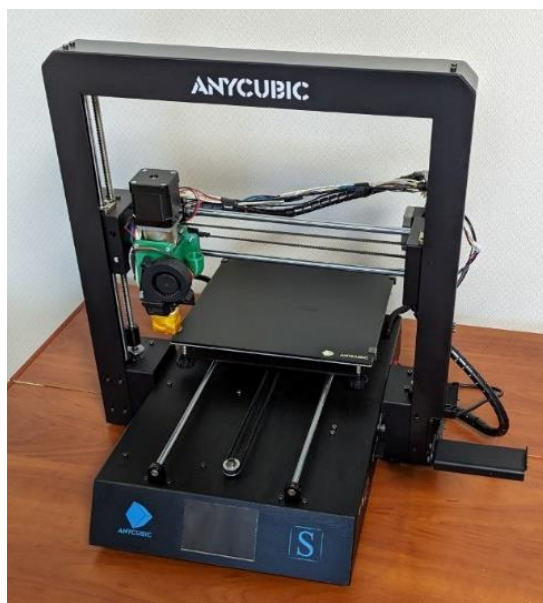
General view of the Anycubic 3D printer Mega S with installed extruder for printing with a mixture of composite material
